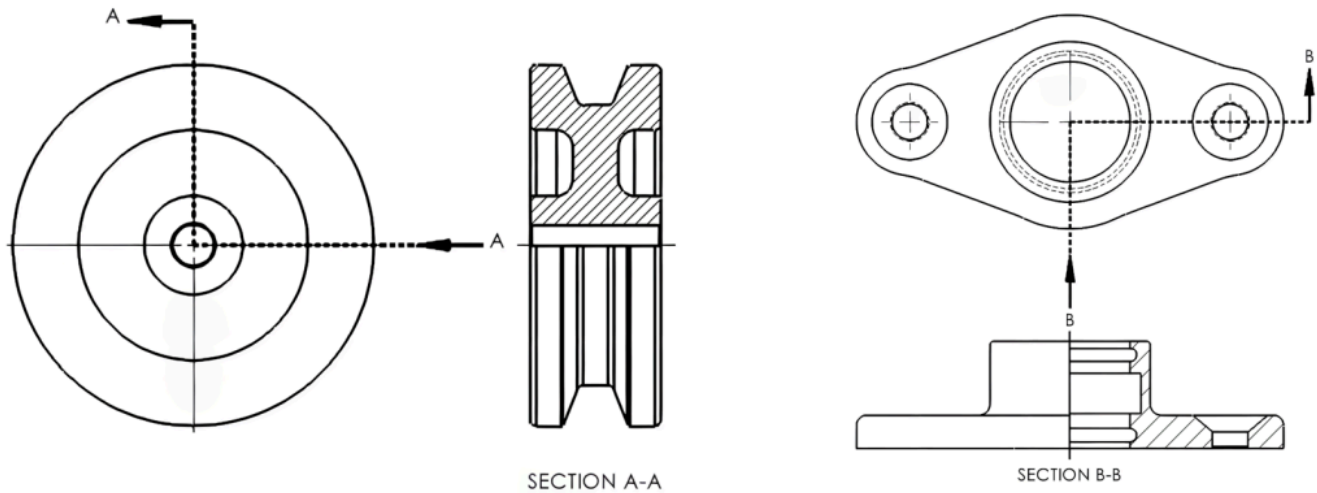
Half-section view – one-fourth of the part is removed, revealing one-half of the material.
